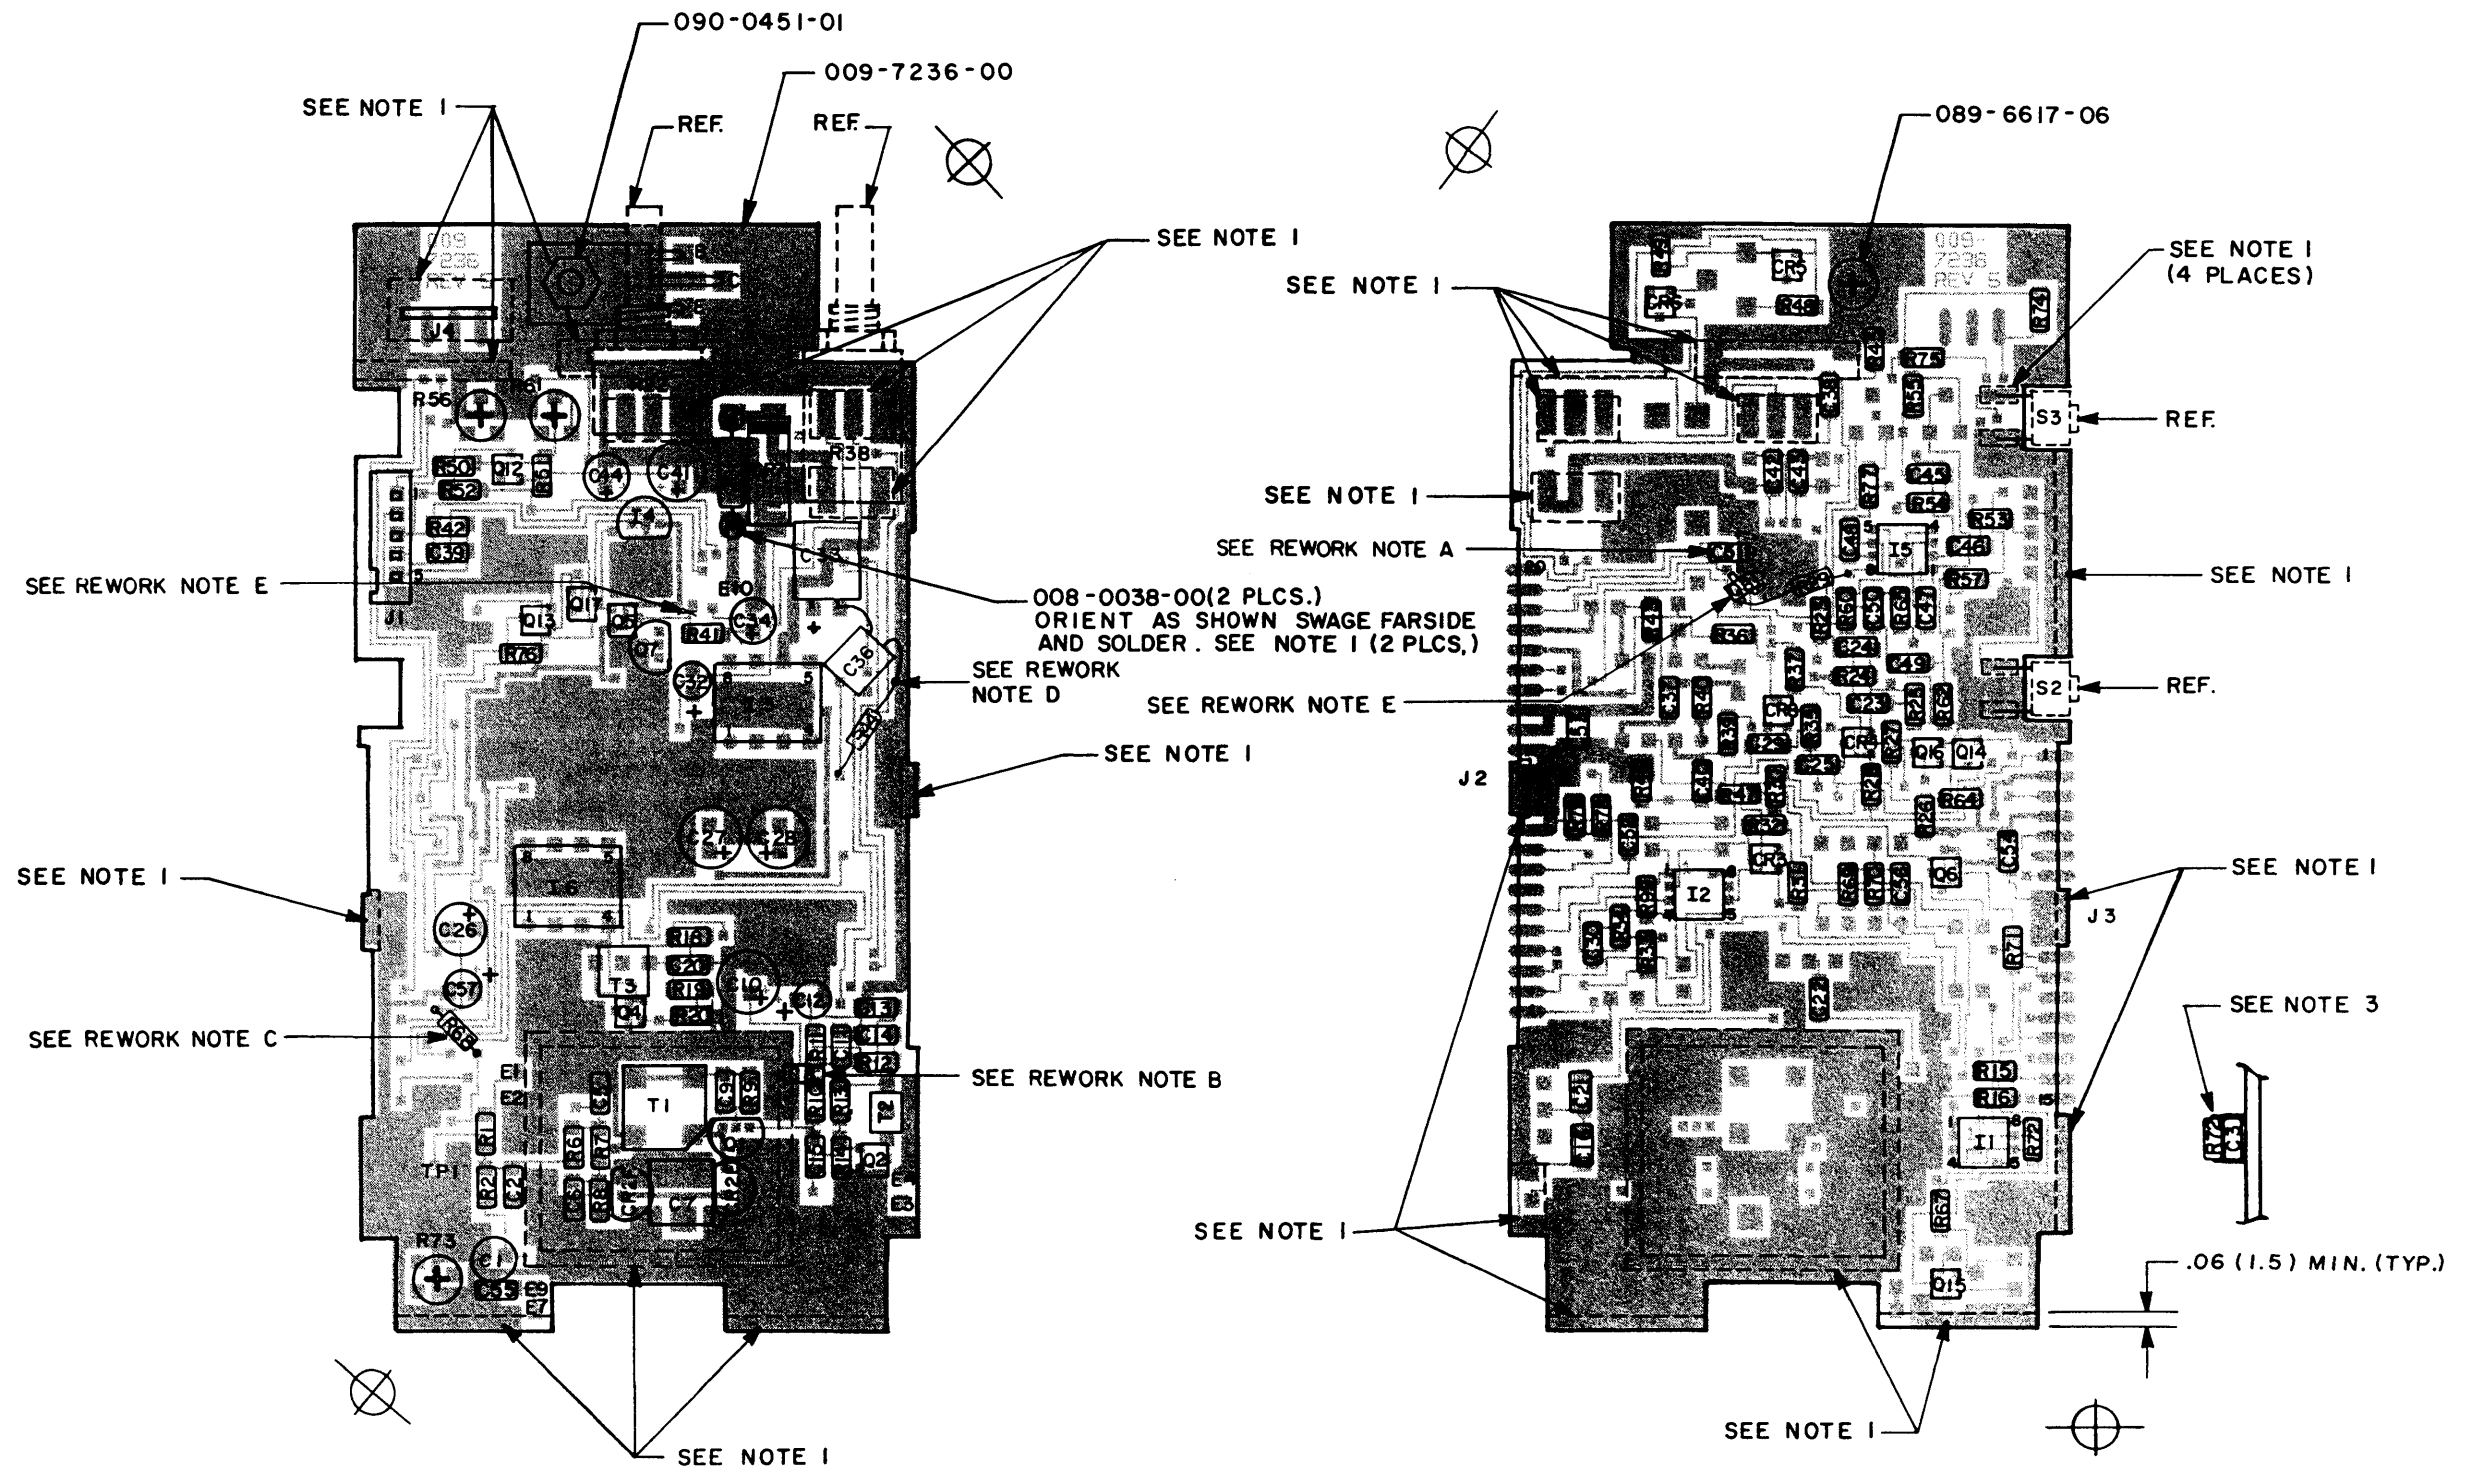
AUDIO/SYNTHESIZER BOARD ASSEMBLY
